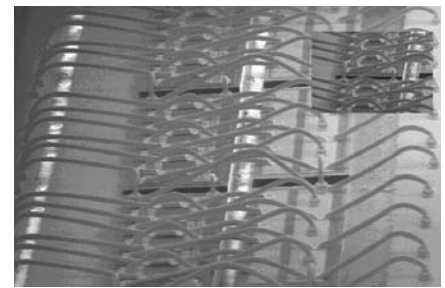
Ball bonded transmitter assembly @ 15x magnification.
